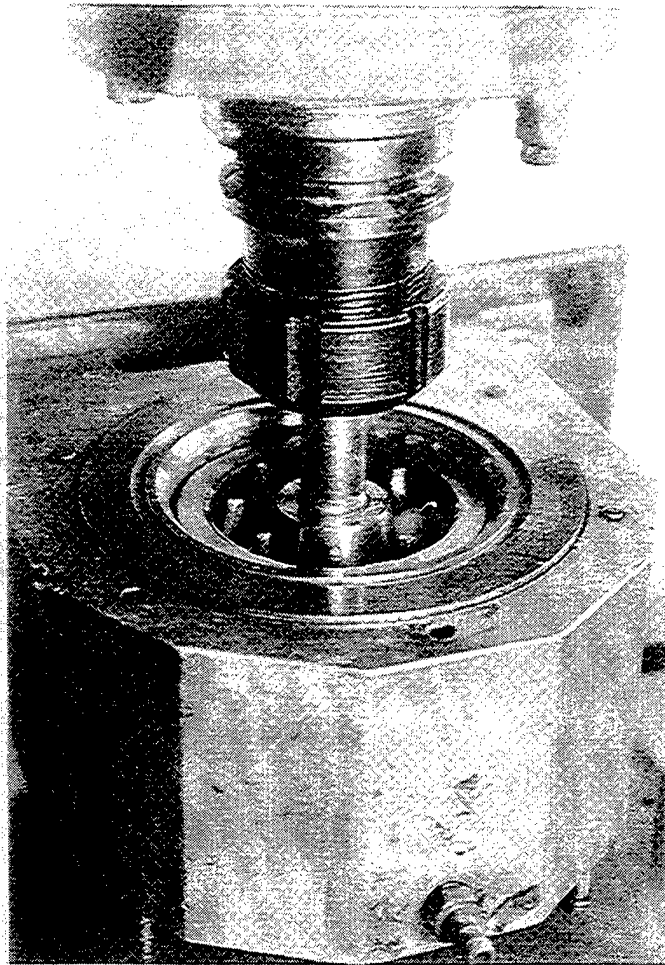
Photograph of the magnetic fluid grinding equipment for ceramic rollers showing the drive shaft, the cage (roller holder), rollers, float, and the float chamber
